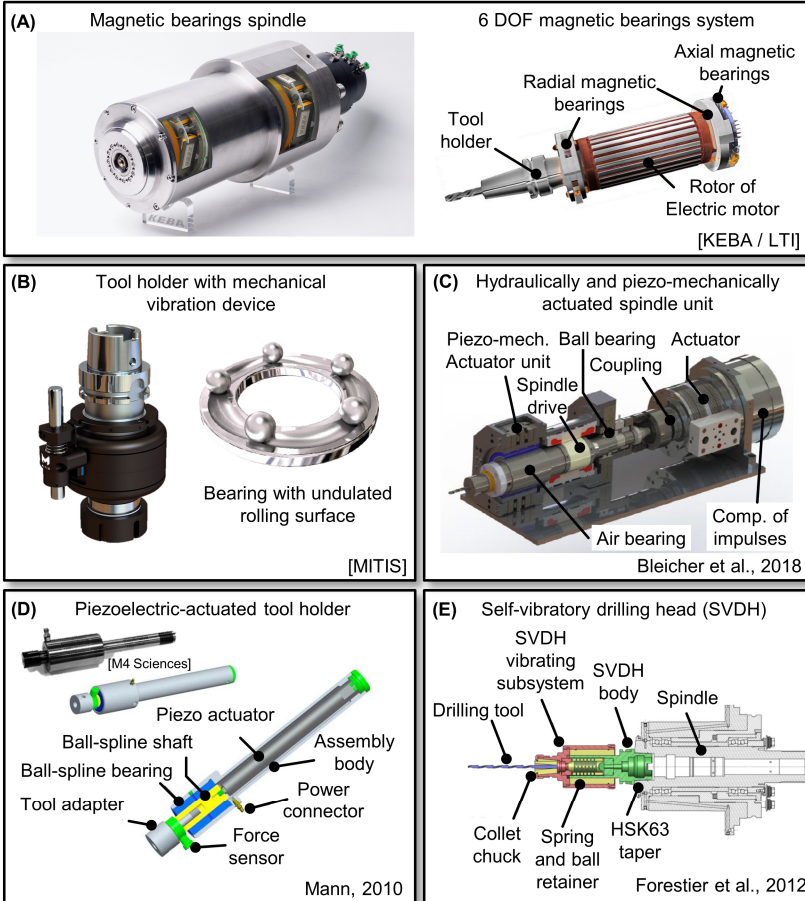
Devices for vibration assisted drilling (VAD), (A) Magnetic bearing spindle with six degrees of freedom; (Courtesy: LTI motion GmbH/KEPA AG), (B) Mechanical tool holder for VAD; (Courtesy: MITIS SAS), (C) Hydraulically and piezoelectrically actuated spindle unit; (Bleicher et al., 2018), (D) Piezoelectric-based tool holder for low-frequency high-amplitude VAD; (Mann, 2010). (E) Self-vibratory drilling head; (Forestier et al., 2012)
